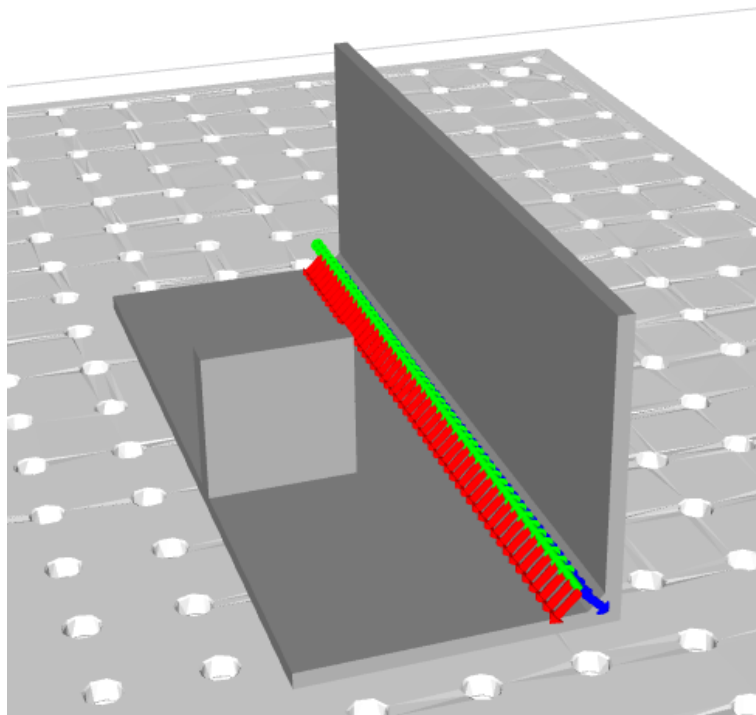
Workpiece with trajectory, placed on the welding table.
